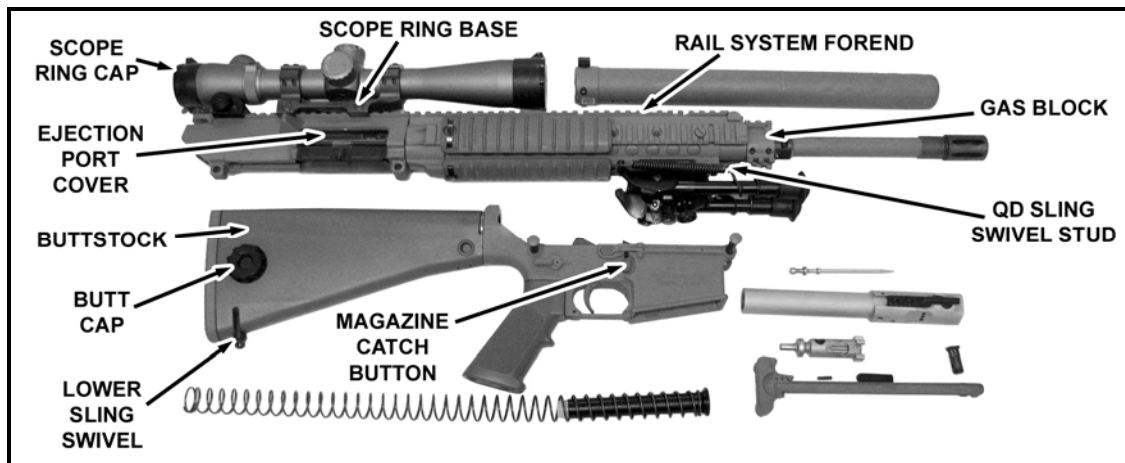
M110 Semiautomatic Sniper System field-stripped for cleaning, inspection, and lubrication.
